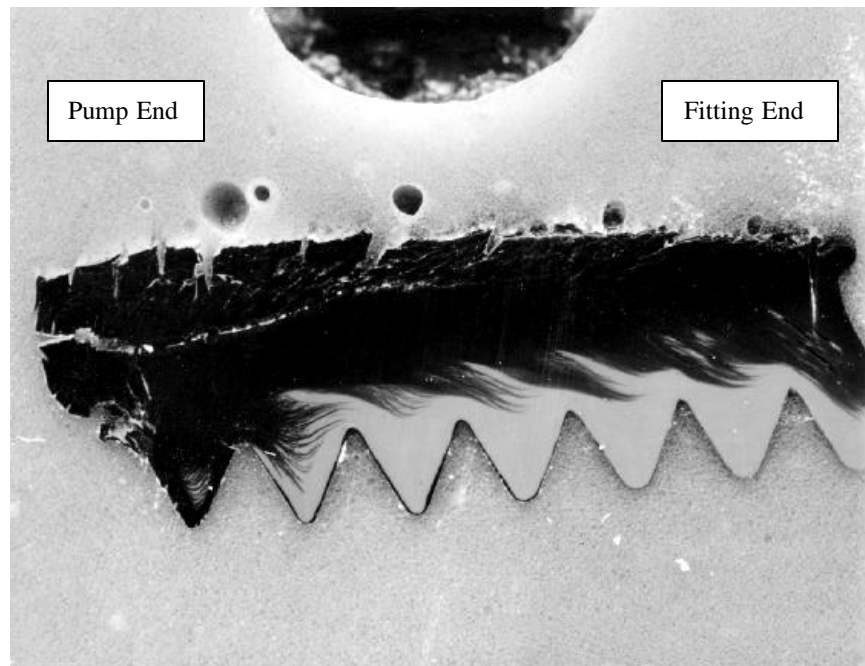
As-polished cross-section of fitting threads (Neg#55000, ~3X)
